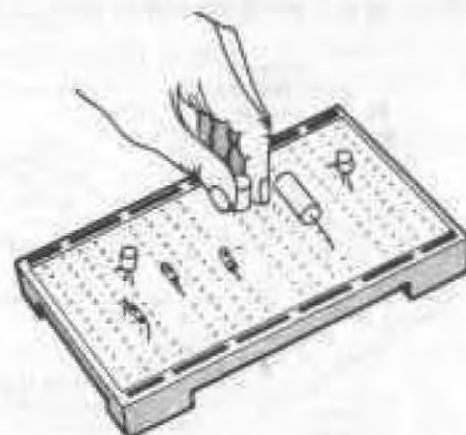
Modern breadboard unit with spring location for components pushed in position.
